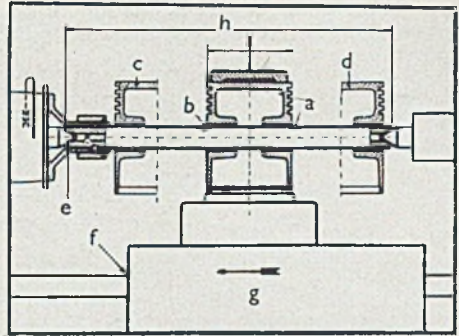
Arrangement for using hard-metal and diamond tool in the same set-up; the hard-metal tool has left the cut before the diamond enters it: a, hard metal; b, diamond; c, cut begins; d, cut ends; e, diamond; f, hard metal; g, feed.
